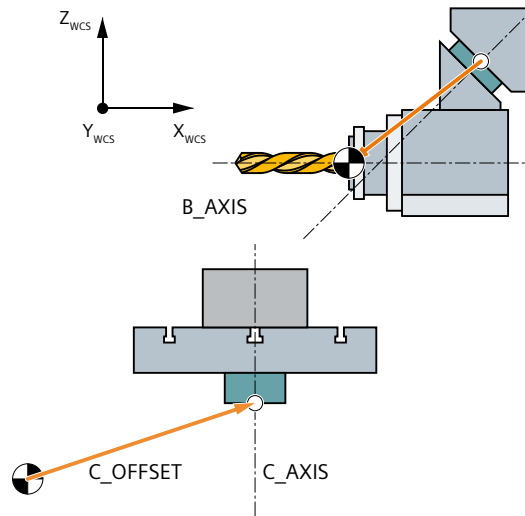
Machine after swiveling plane Z 180° and Y -90°, tool is perpendicular to the cylinder surface
